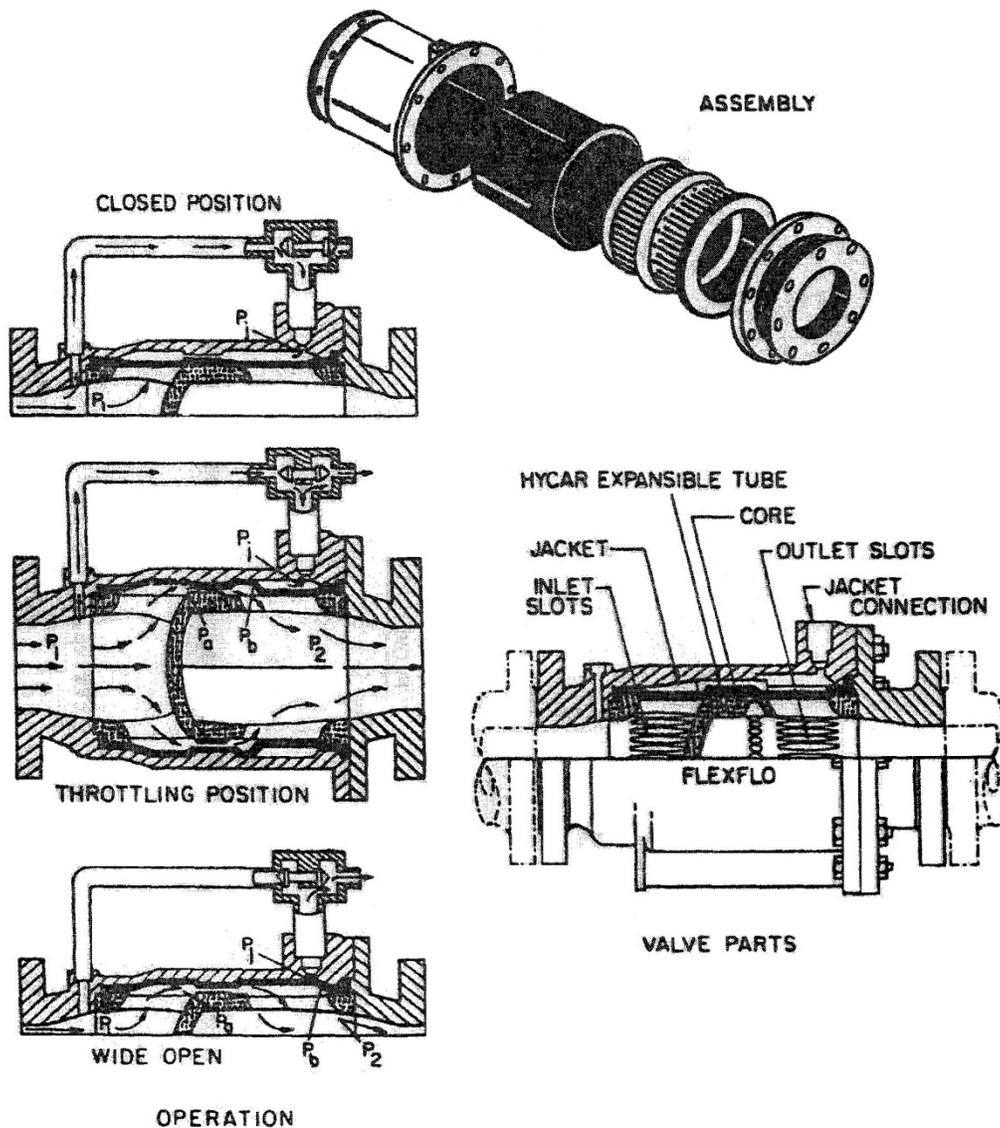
Expandable Tube Valve (Grove Flexflo)
